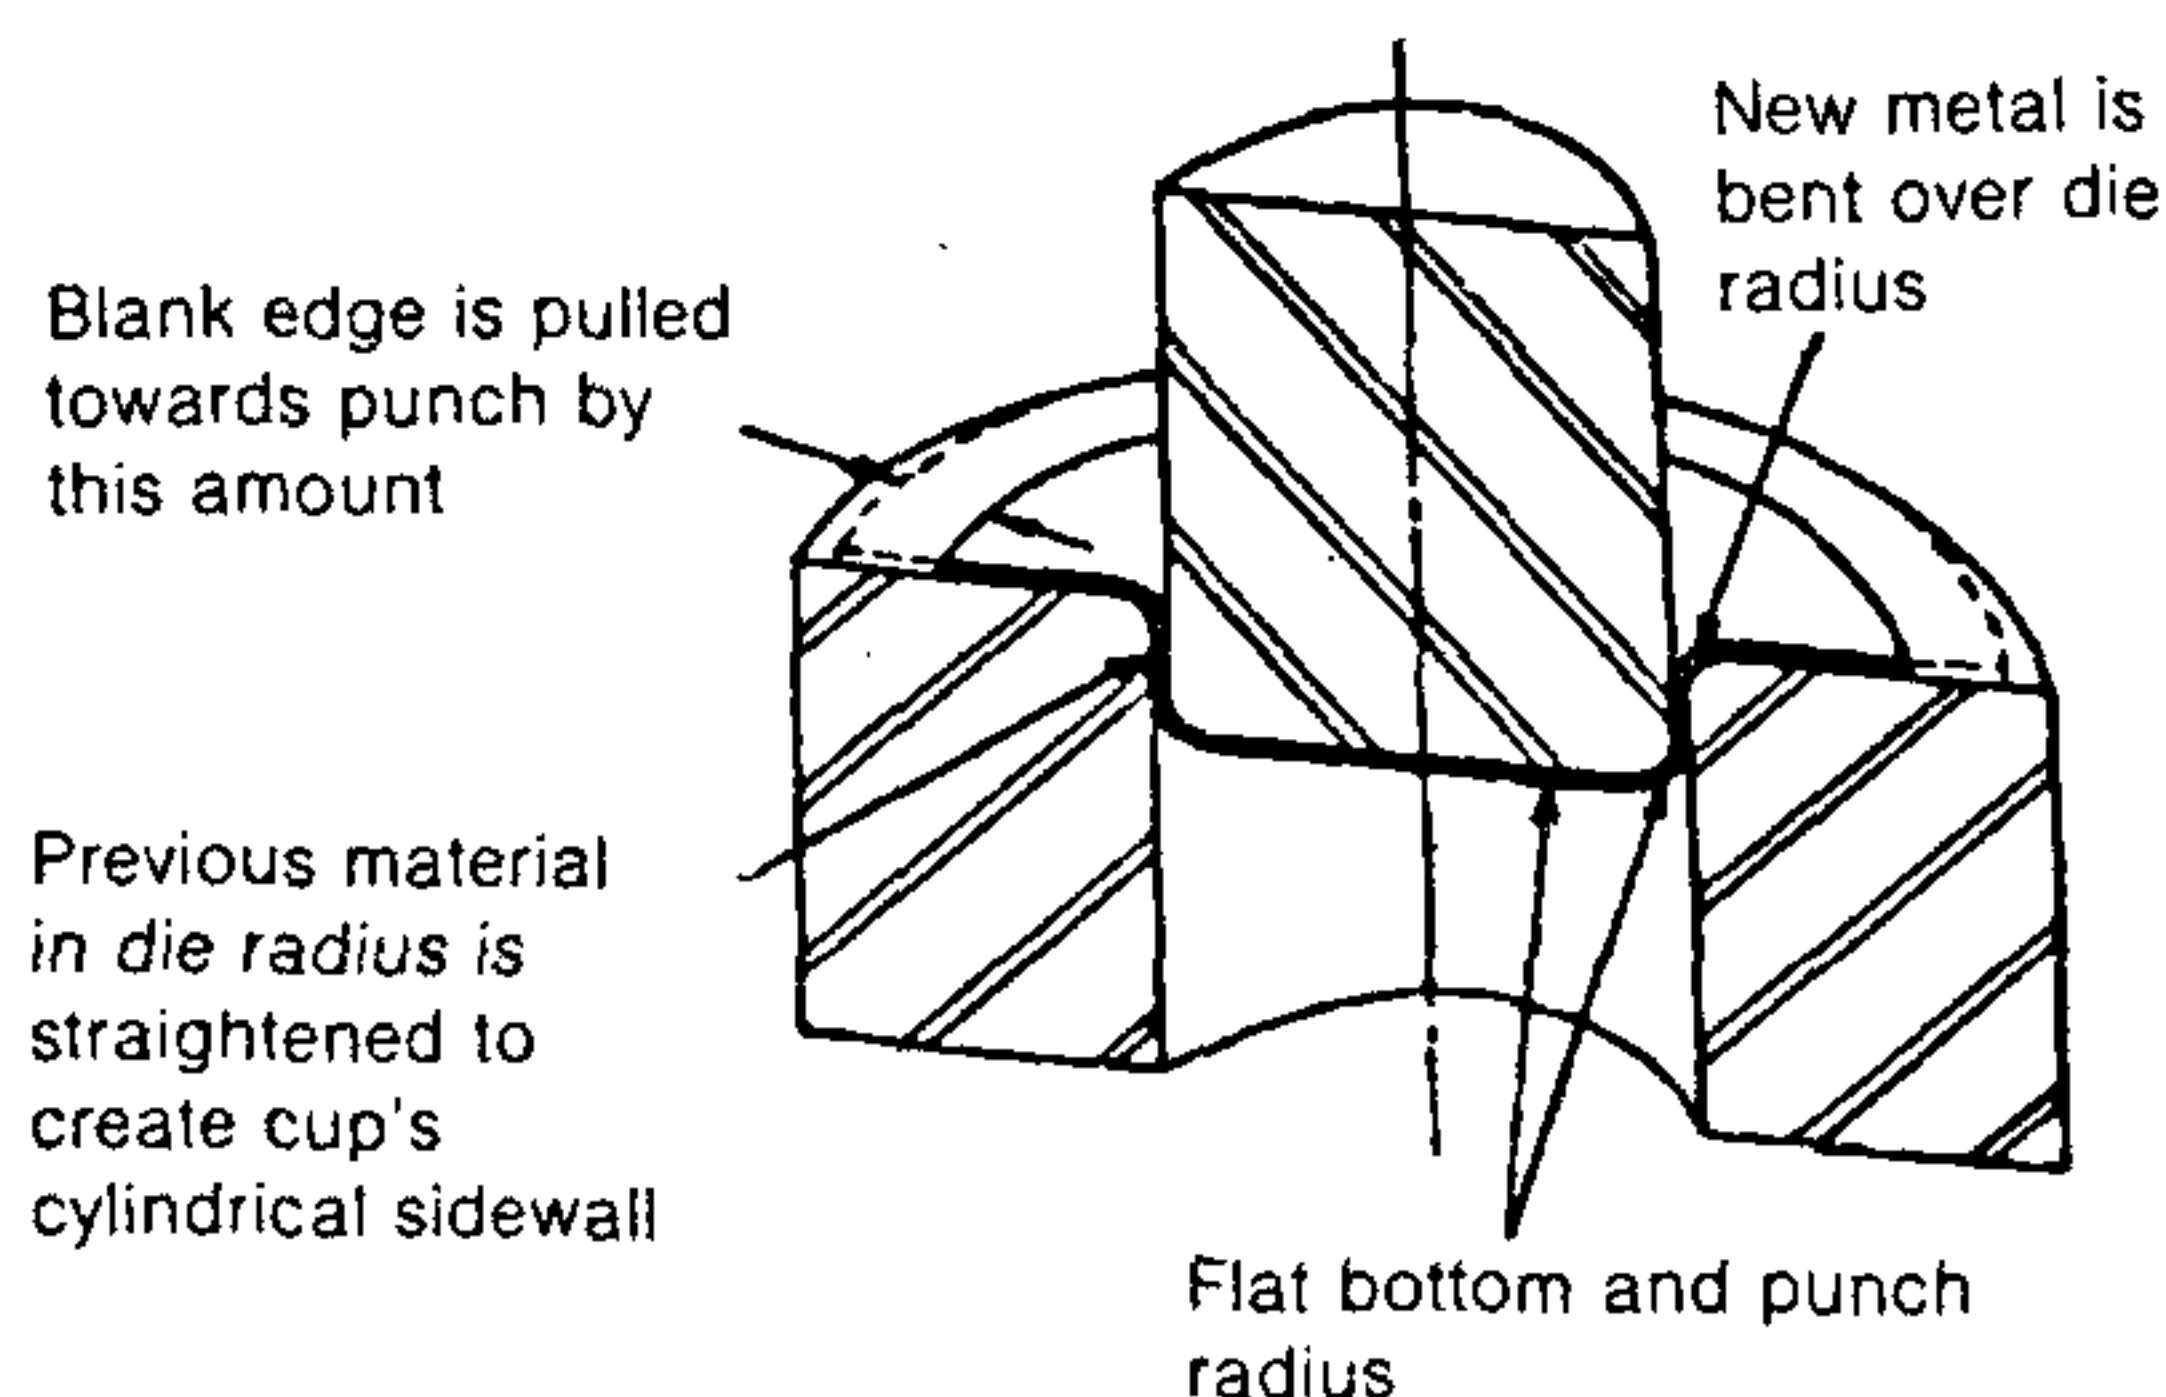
Three-dimensional cut-away view of a cup drawing operation.
